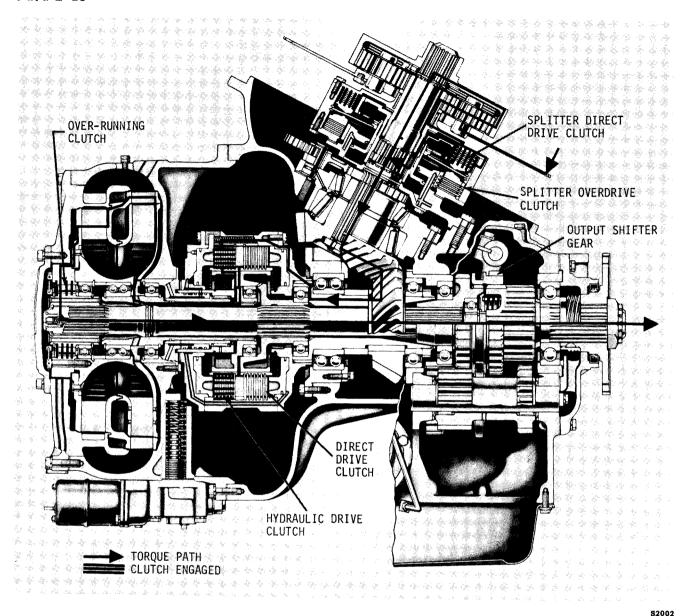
VS2 Series, forward, hydraulic drive, first gear-torque path
